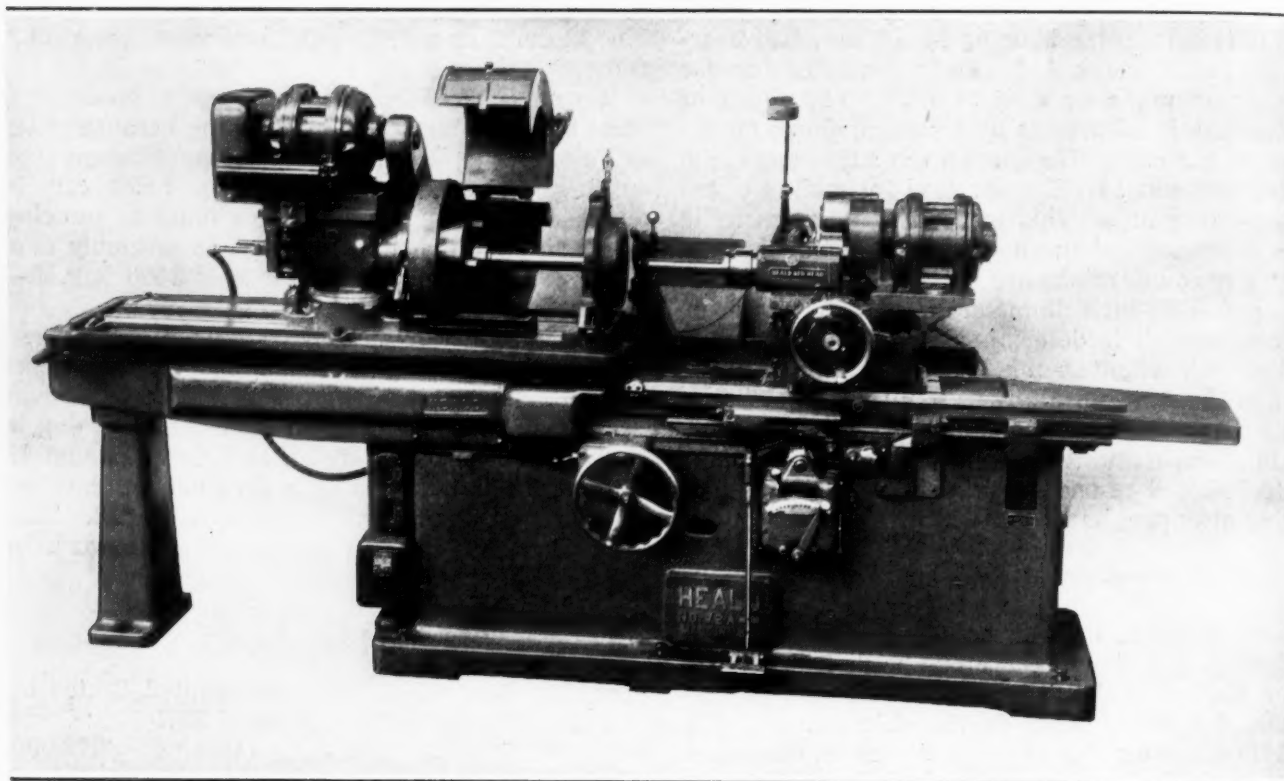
Standard Heald Internal Grinding Machine Equipped with an Extended Bridge, Swivel-plate, and Steadyrest for Grinding Airplane Shock Strut Cylinders
